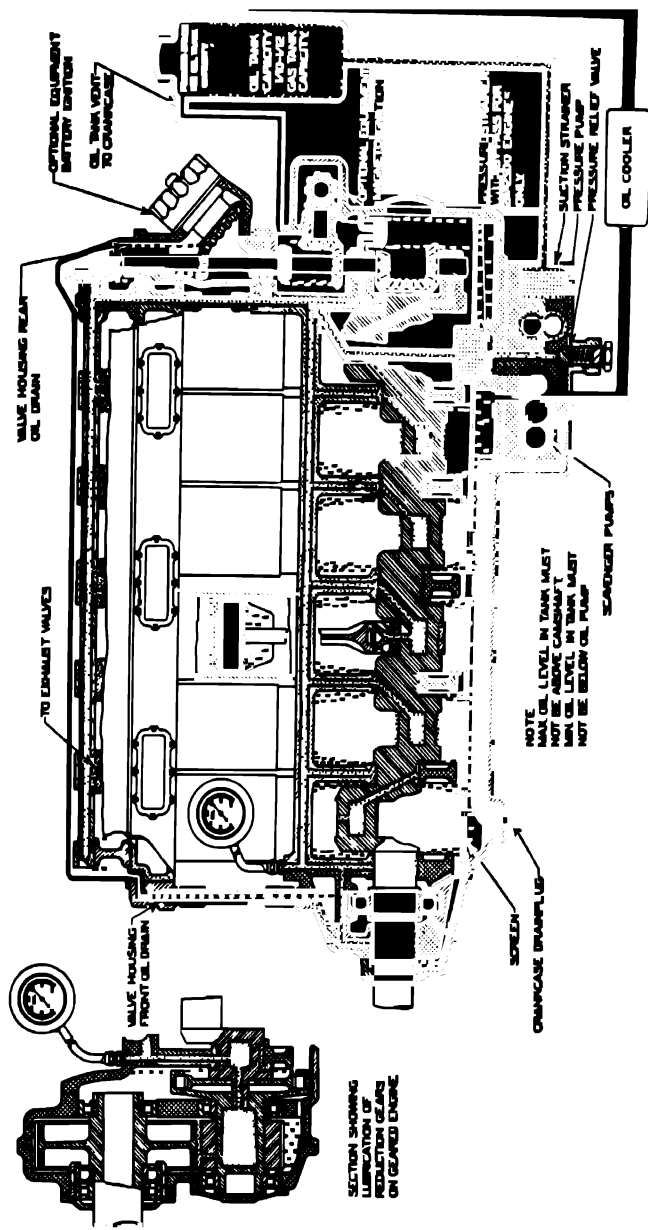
Lubricating Chart of Packard Aircraft Engines Models 1500 and 2500.
